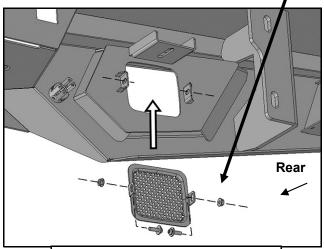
Insert 12mm Double Bolt Plate into mount on back of Bumper. Thread Plastic Retainers onto Bolt Plate to hold in place
